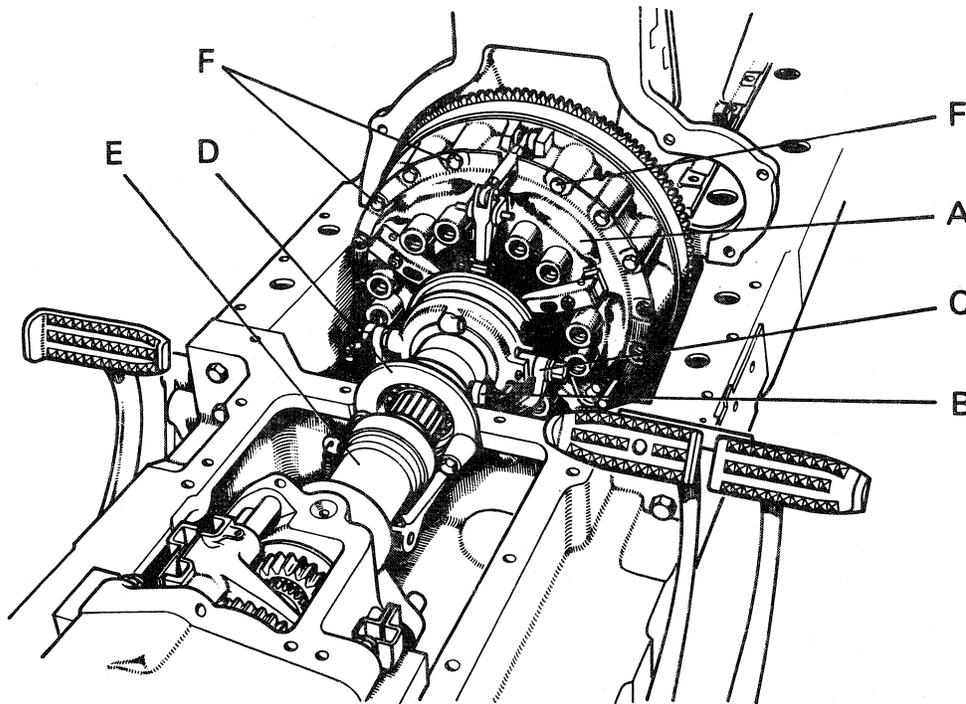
1200 TRACTOR WITH CLUTCH HOUSING AND GEARBOX COVER REMOVED
